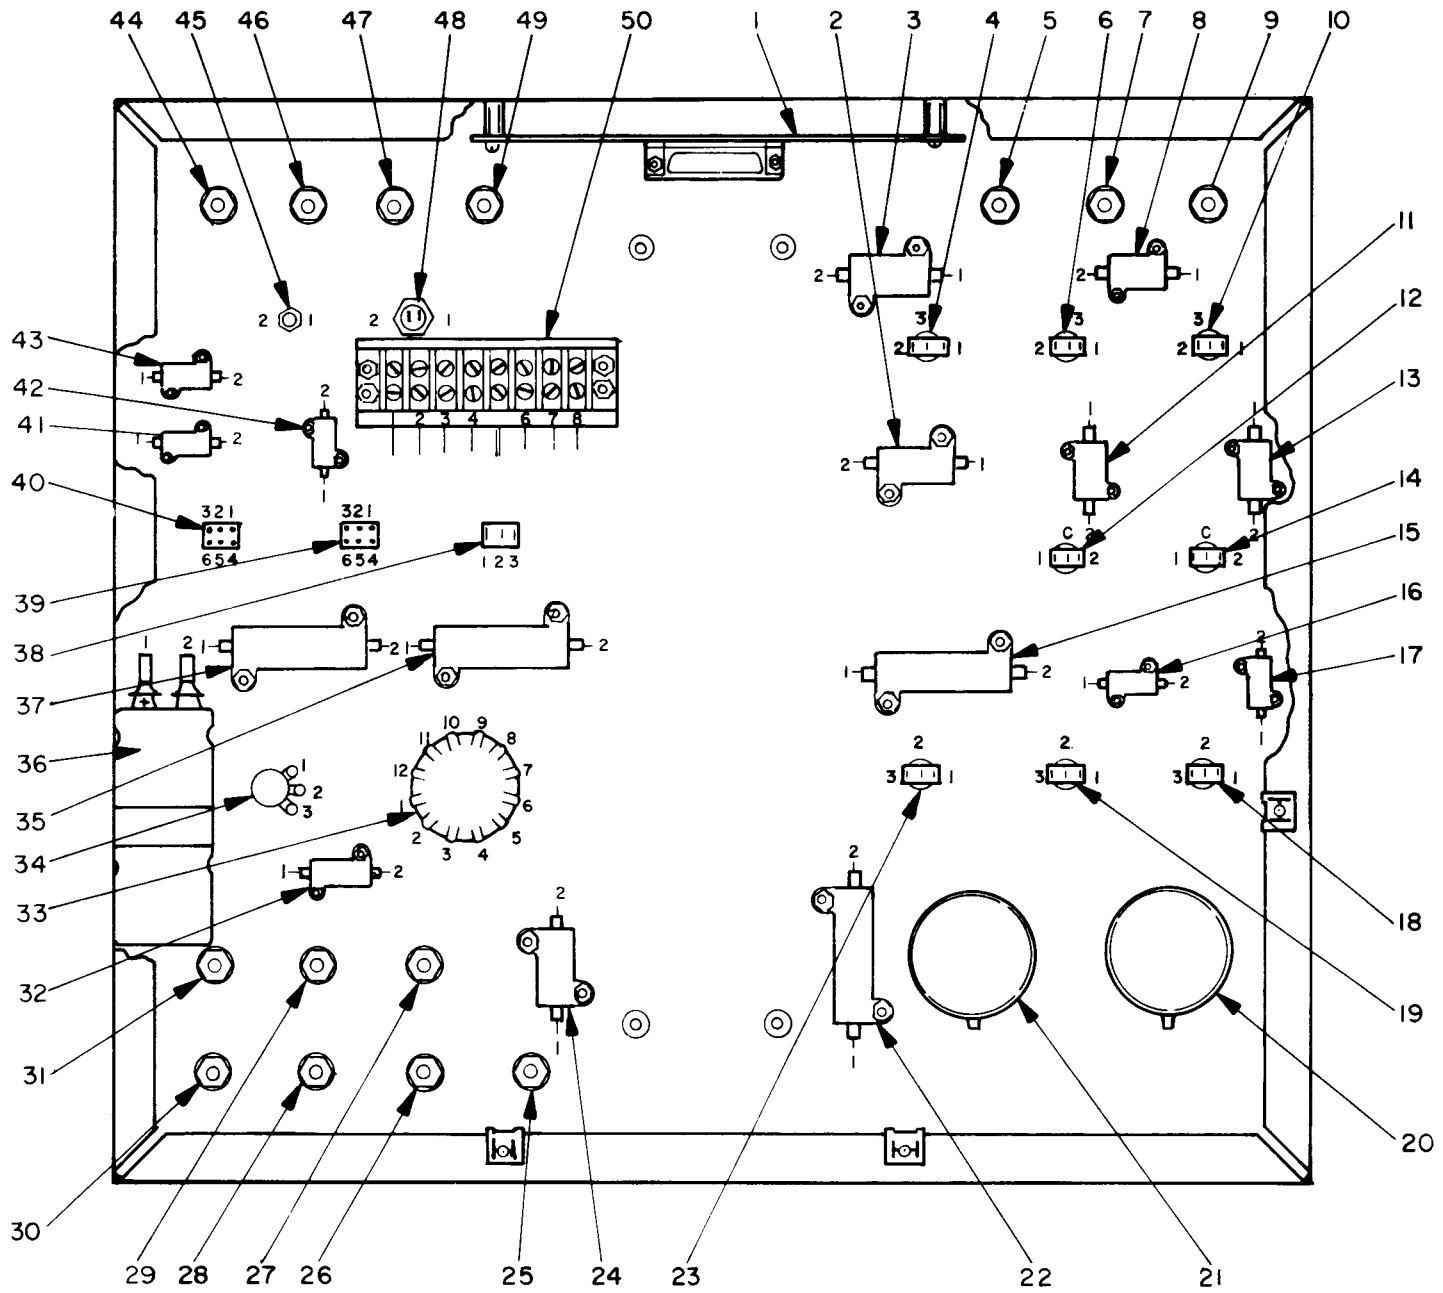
POWER SUPPLY TEST FIXTURE (BOTTOM VIEW).
